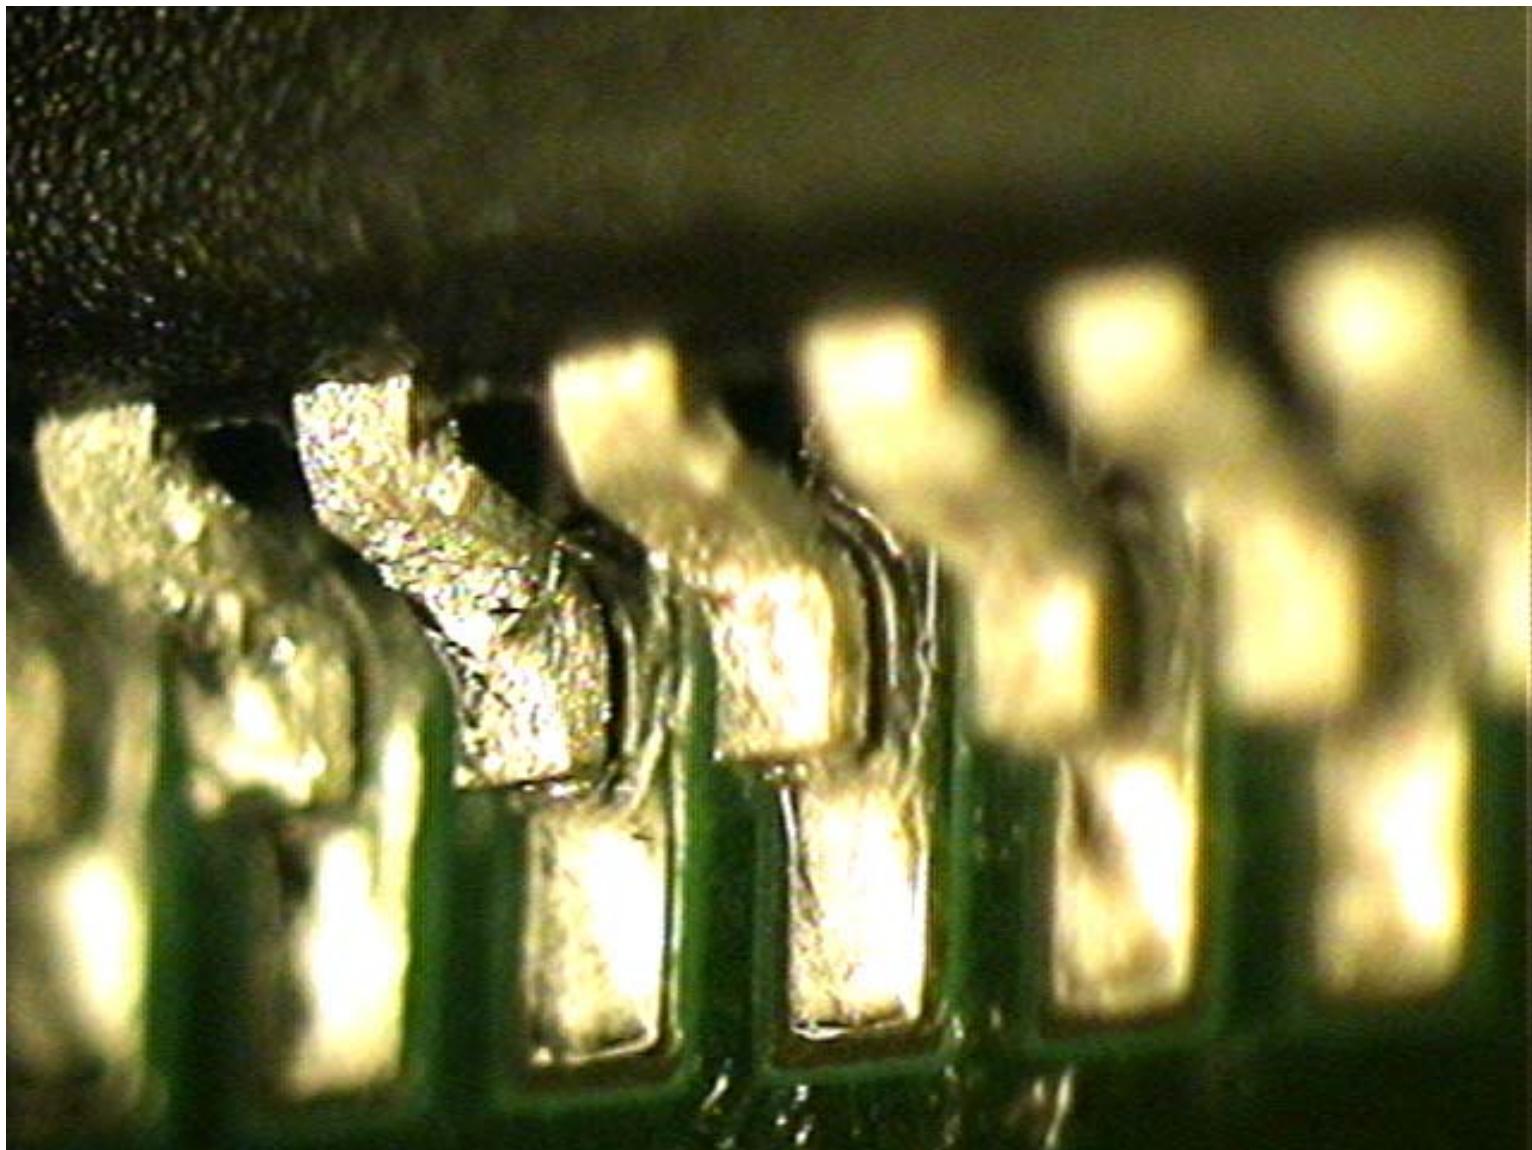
Vehicle ID 188, Reworked TSOP U25, SACB Solder/SnCu Component Finish, 100x
